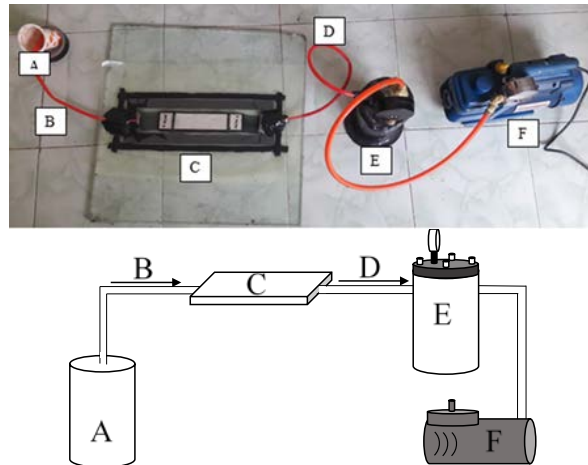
The vacuum-assisted resin transfer moulding (VARTM) equipment.
